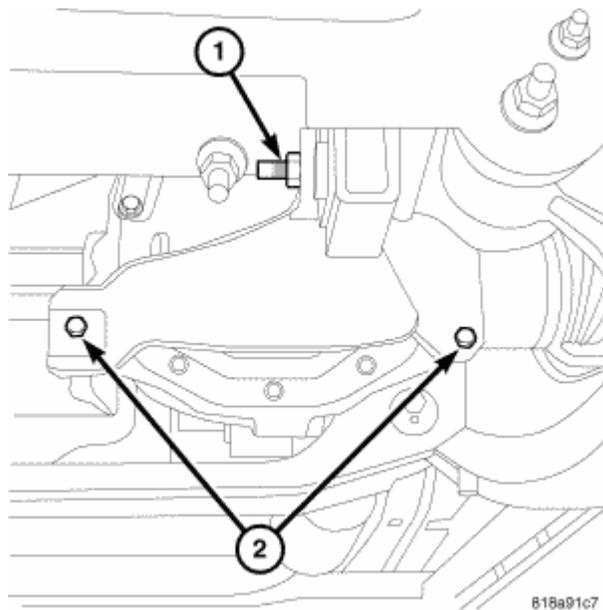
Identifying Front Axle Bracket Cradle Nut & Front Axle Bracket Bolts
